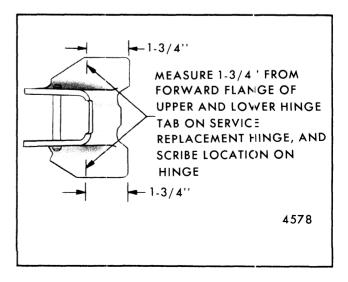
Body Side Hinge Strap Installation - "X" Styles
